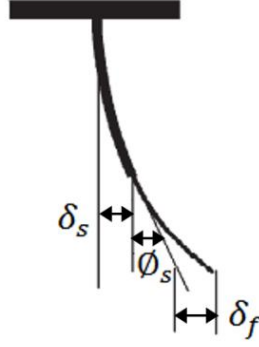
Two-step cylindrical cantilever beam representing deflection of two portions of ball-end milling cutter [7]
